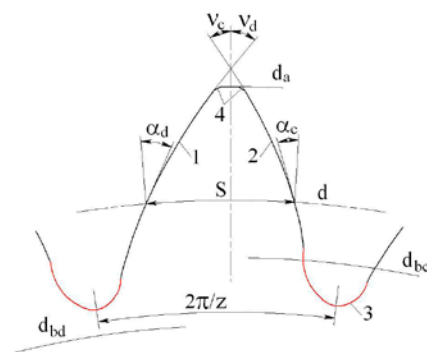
Asymmetric gear tooth profile; 1—drive tooth flank, 2—coast tooth flank, 3—tooth root profile, d_a —tooth tip circle diameter, d —reference circle diameter, S —tooth thickness at the reference diameter, d_{bd} and d_{bc} —drive and coast flank base circle diameters, v_d and v_c —drive and coast flank involute intersection angles, α_d and α_c —drive and coast flank profile angles at the reference diameter, z —number of teeth.
